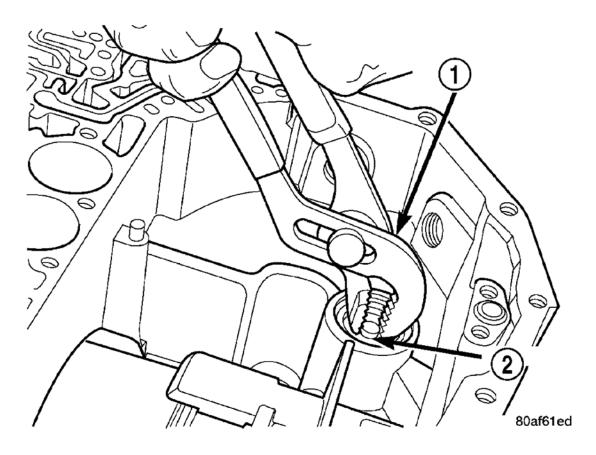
Installing Low/Reverse Accumulator Courtesy of CHRYSLER LLC
